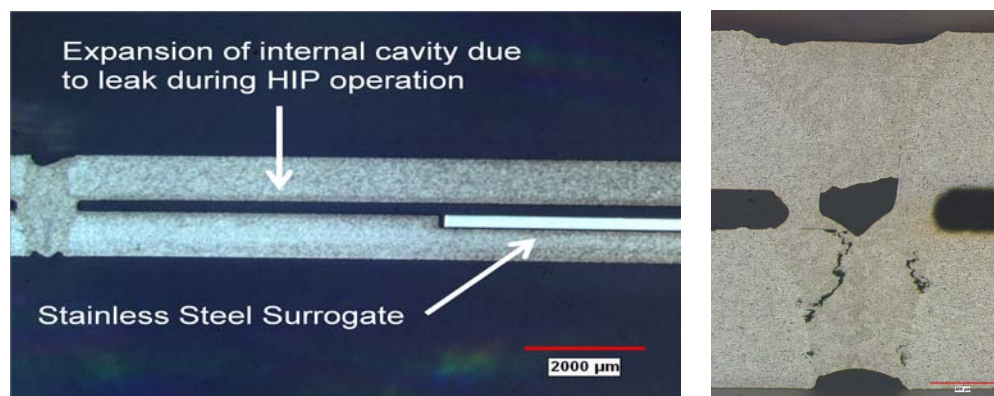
Cross-sections of surrogate fuel foil assembly in vicinity of weld divot processed with canless HIPing.
